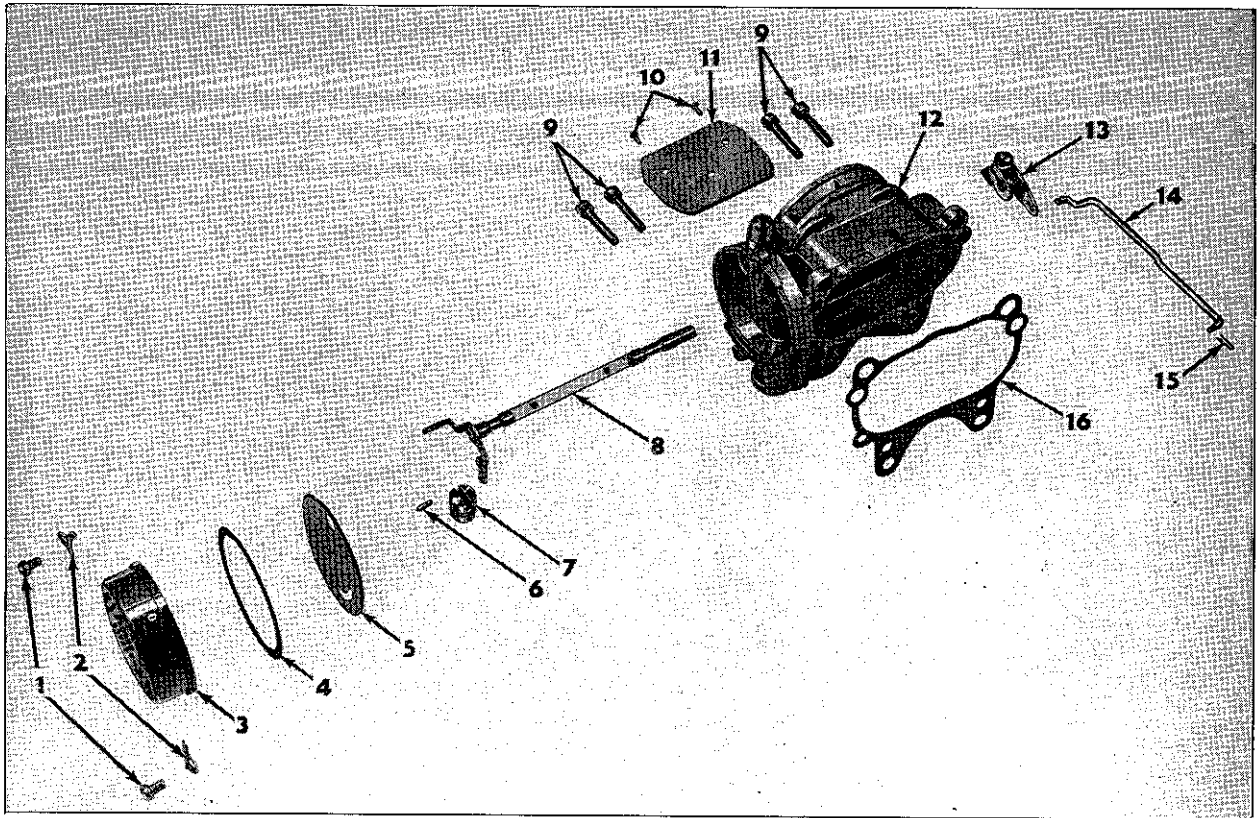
2204S CARBURETOR AIR HORN AND ATTACHING PARTS
